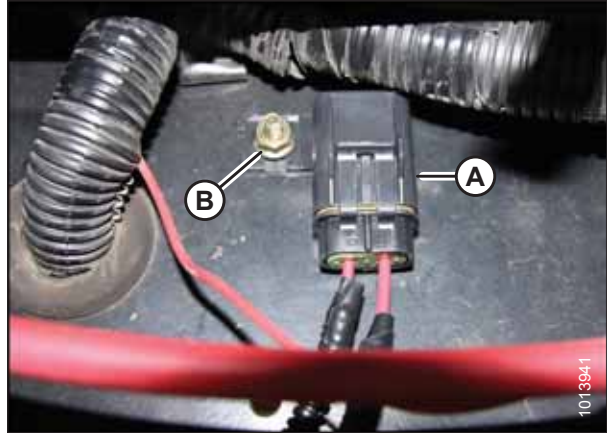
Fuse Holder Mounted inside Frame Rail
